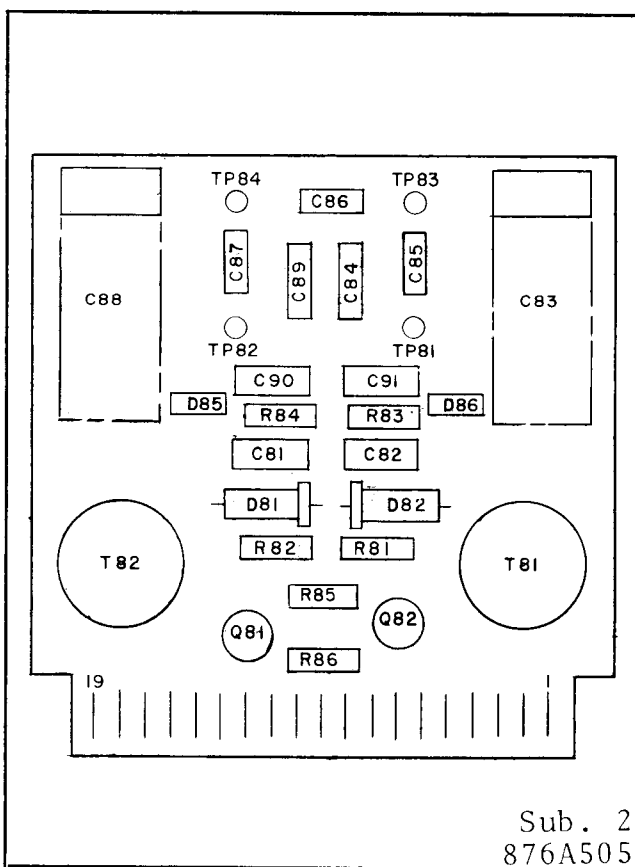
Component locations on the oscillator and mixer printed circuit board.
